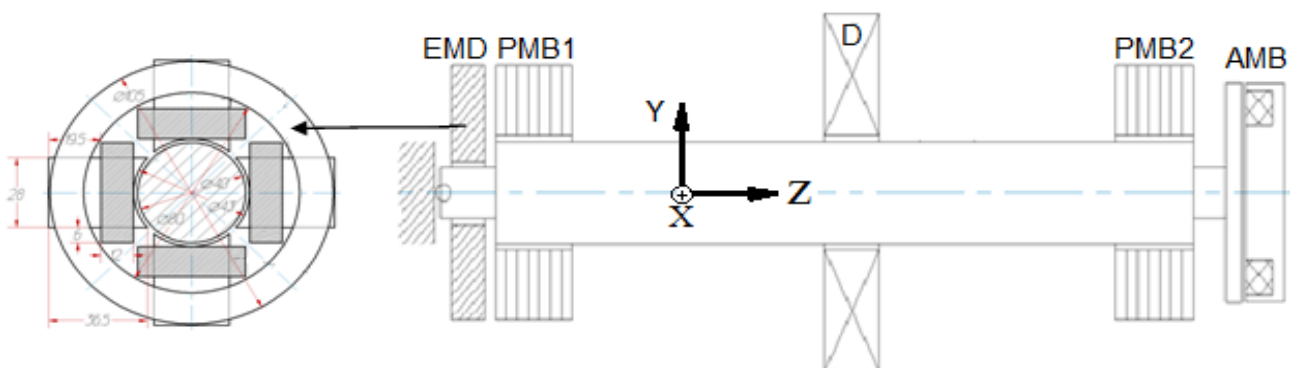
General layout of the hybrid magnetic suspension for the rotor
